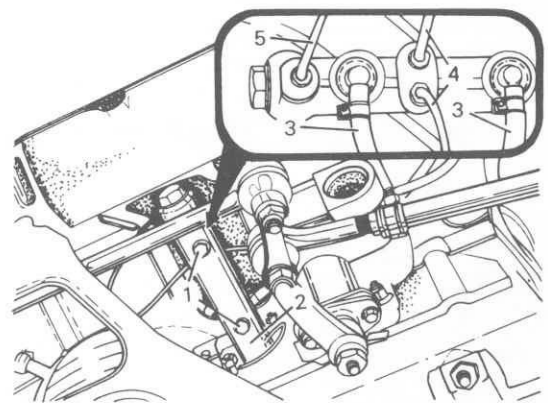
7 Installation view of master cylinder. The inset is a plan view
